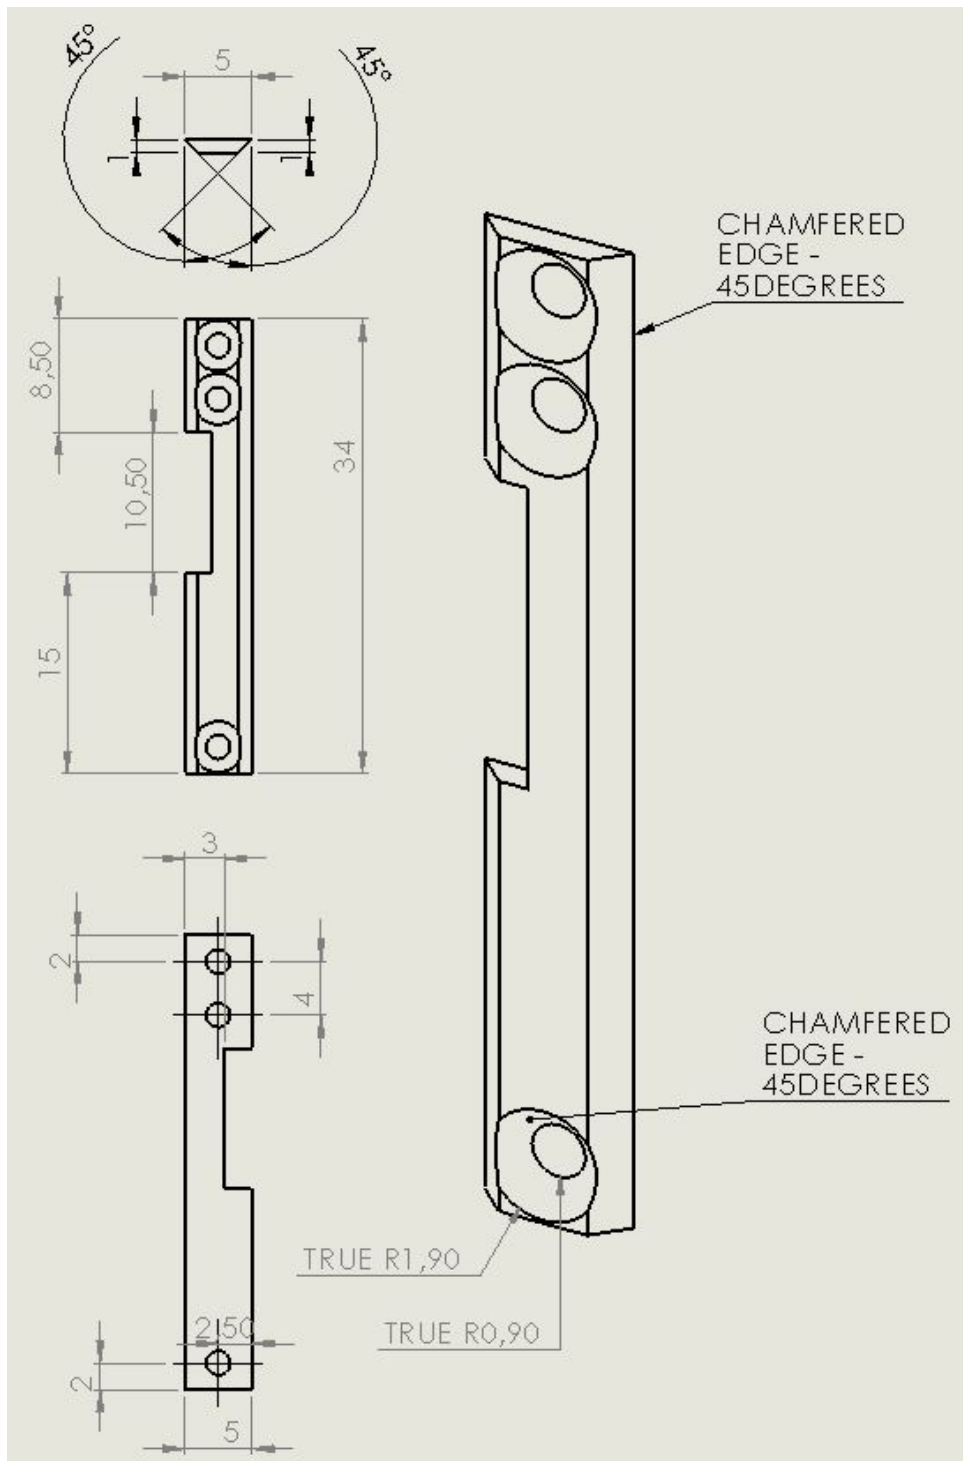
Solidworks model drawing of the right-hand (in relation to the incoming beam), inner frame bar of the cryostat holder
